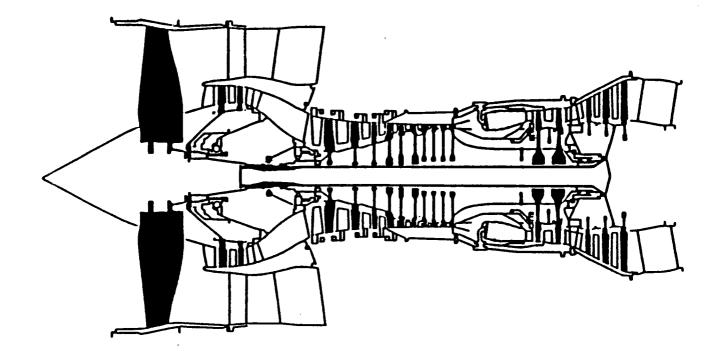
LAYOUT OF BR 715 ENGINE
